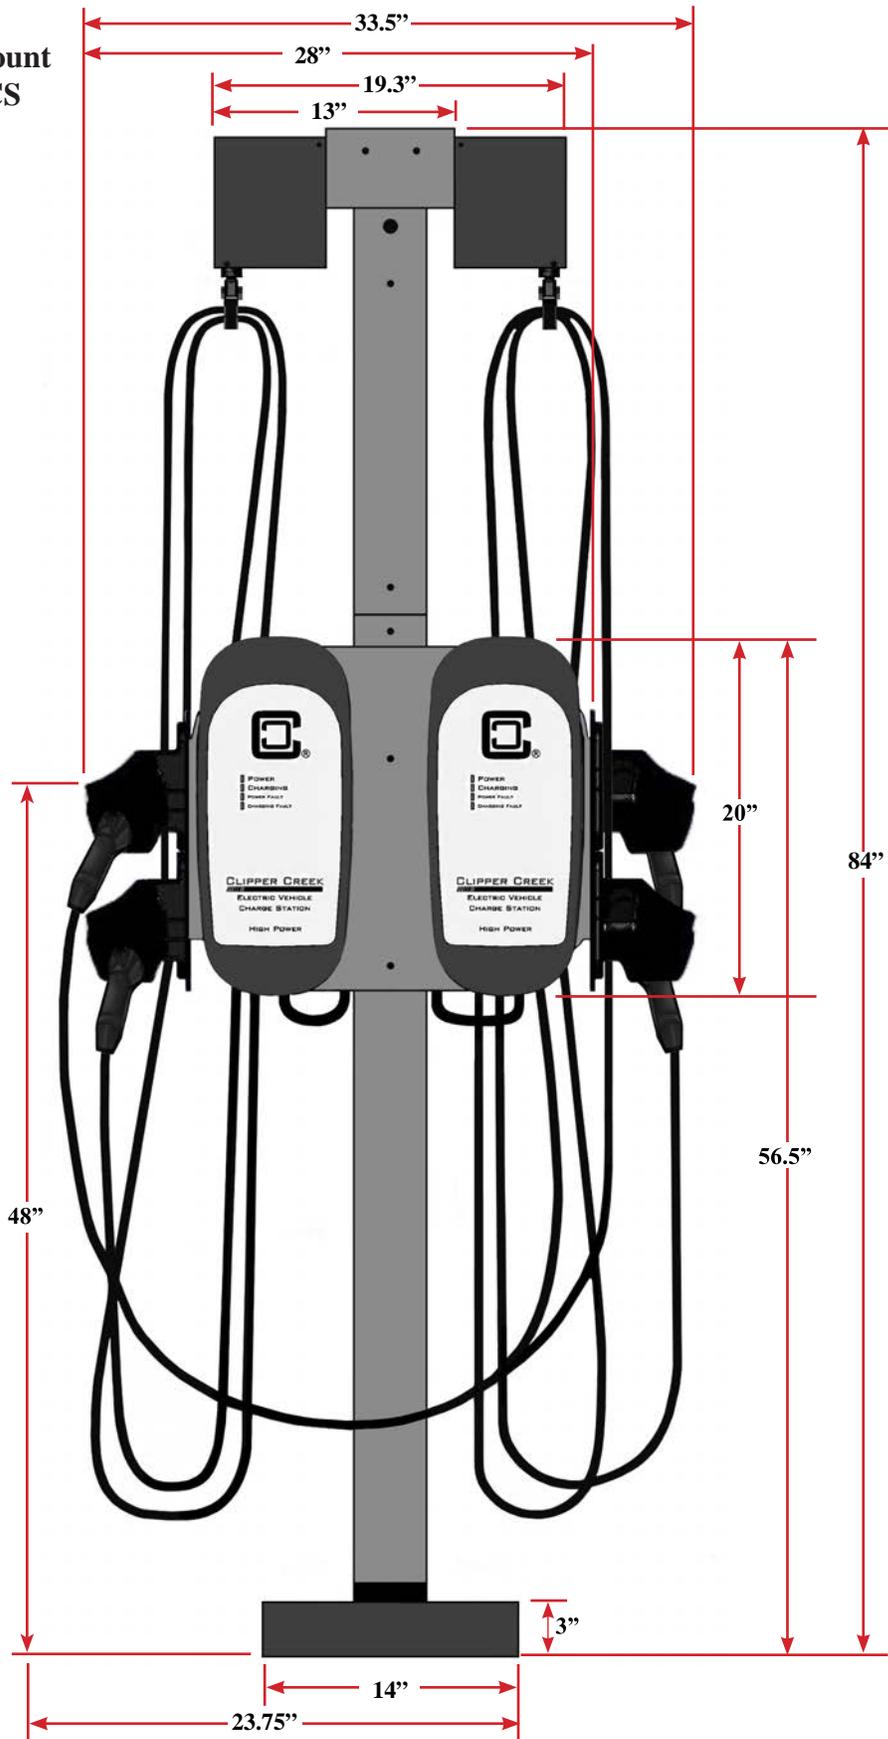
Pedestal Dimensions for Single-Mount and Dual-Mount HCS Installations
